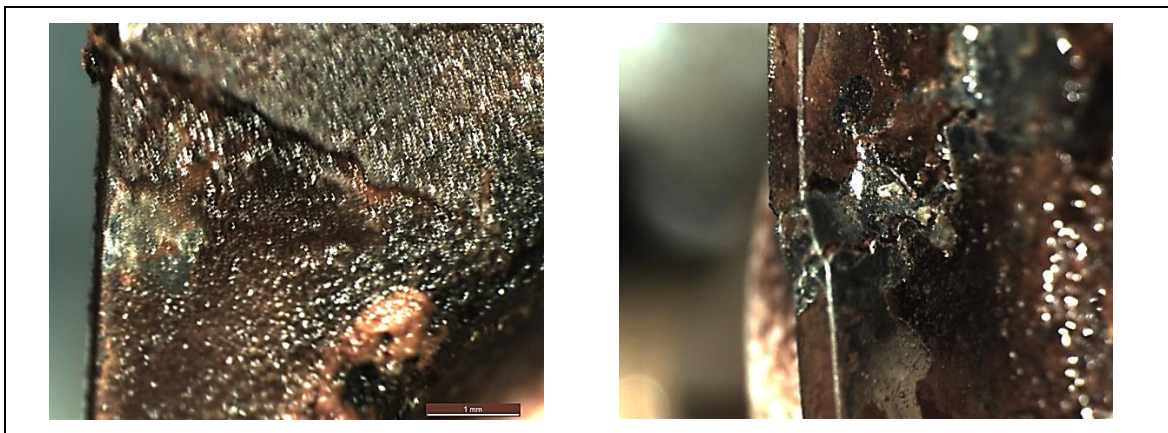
Batch 2 U-bend specimens showing locations of cracks. (Left) S500 specimen (Right) S545 specimen.
